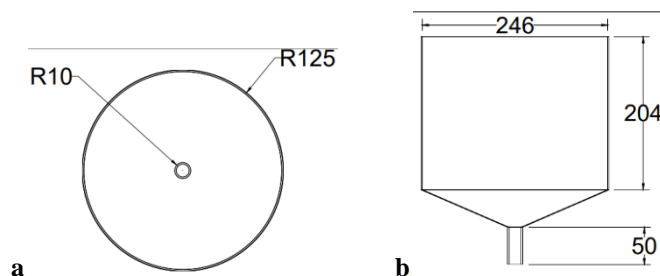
Plan and side views (a,b) with configuration (mm) of the mixing chamber
